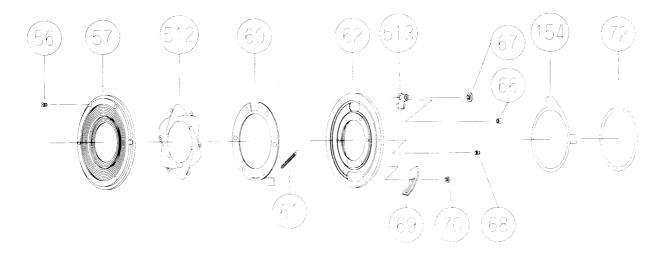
Olympus Diaphragm Housing Assembly (Ref. 524)
